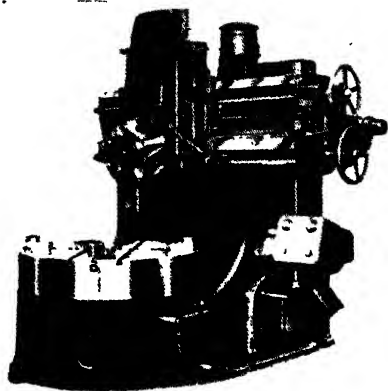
Vertical Turret Lathe and Boring Machine.
